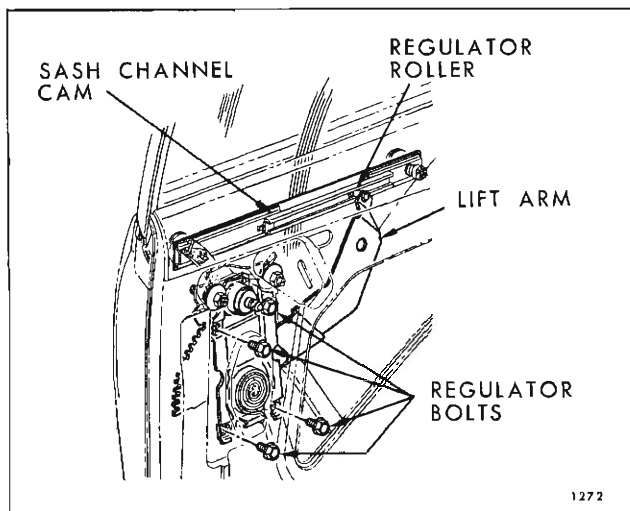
E6—"37" Style Rear Quarter Window Regulator Assembly
